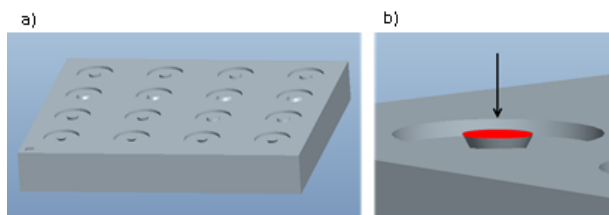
a) CAD model of test component with array of Ø0.5mm circular pads, b) Close-up of structure with 45° undercut with droplet target location indicated in red.
